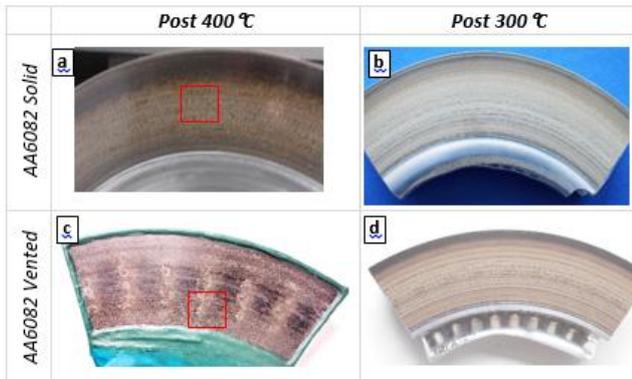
Photographs showing surfaces of coated discs after 400°C and 300°C brake test
